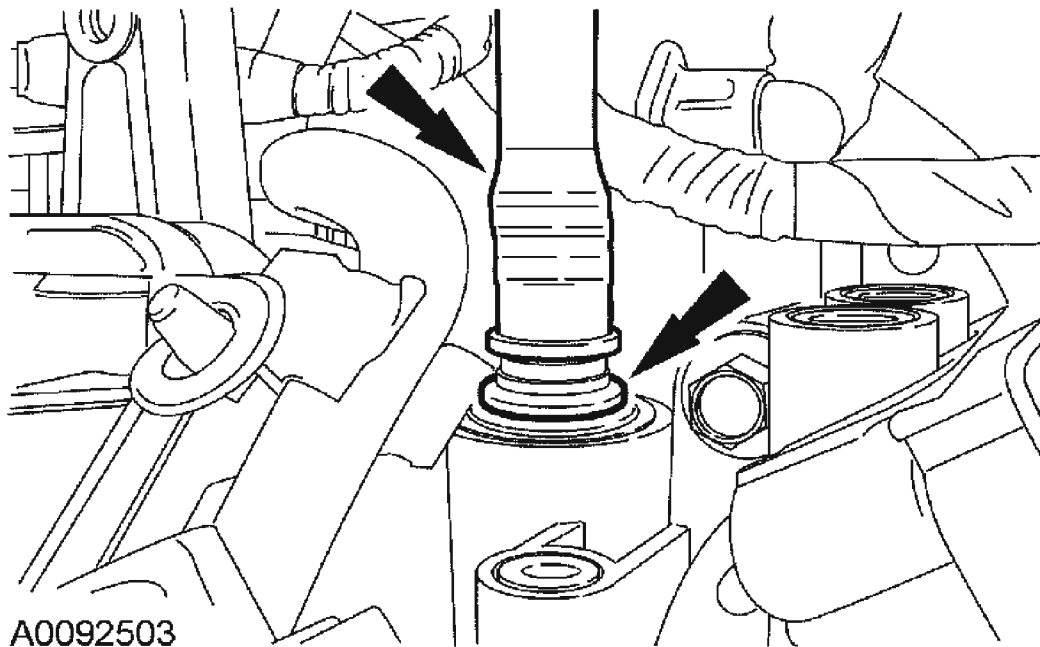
Disconnecting Power Brake Booster Vacuum Tube
